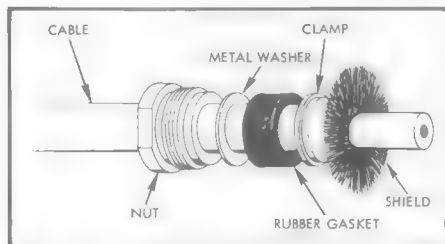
Fabricating RG-9B/U and RG-87A/U Cable to DIC-2532 and DIC-2533 Connectors (Sheet 2)
